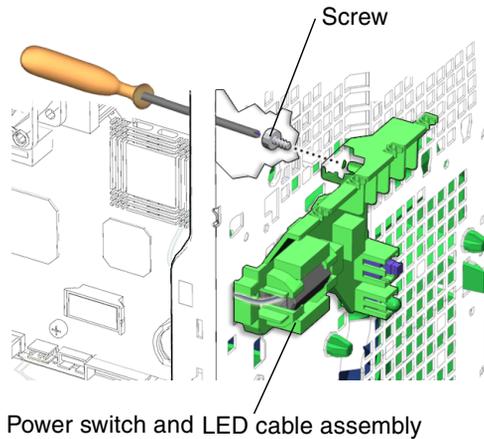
Installing the Power Switch and LED Cable Assembly
